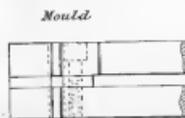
Typograph; mould. Elevation. Scale: half size.
